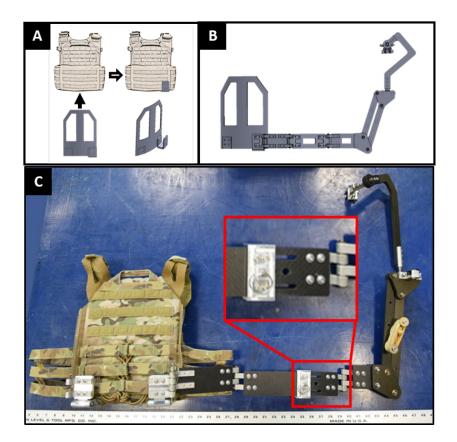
Computer-aided design (CAD) drawing and actual prototype image. A) CAD drawing of carbon-fiber insert that conforms to the ballistic plate fitted with a rear hinge allowing for articulation away from the body. B) CAD drawing of full 3ARM prototype with "Q arm" attachment for connection to the weapon pic rail. C) Prototype 3ARM used in current evaluation. A sliding mechanical design (enlarged) secured by pins allows for adjustment of the length of the middle carbon-fiber link. An elastic element seen on the distal link of the 3ARM helps to support the load of the weapon and suspend it in front of the user.
